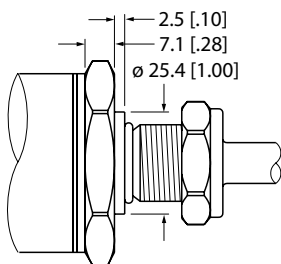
Design with raised face (R10) – Housing nut with thread, dimensions in mm [in]
